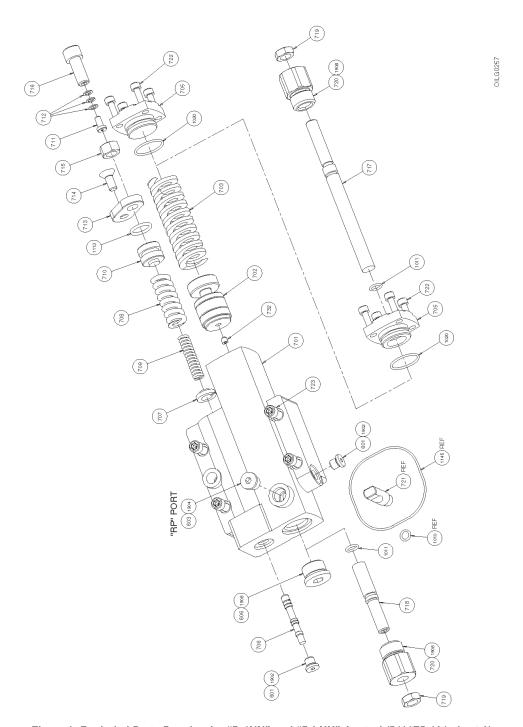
Exploded Parts Drawing for "P-1NN" and "P-LNN" Control (519975-101 sheet 2)
